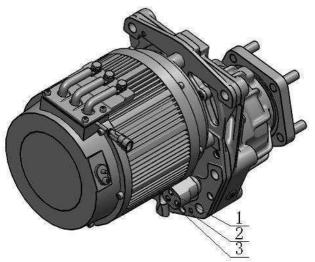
Position of brake oil port 1. Breathing cap connector 2. External braking hydraulic oil connector (M10X1) 3. External parking brake hydraulic oil connection (M10X1)
